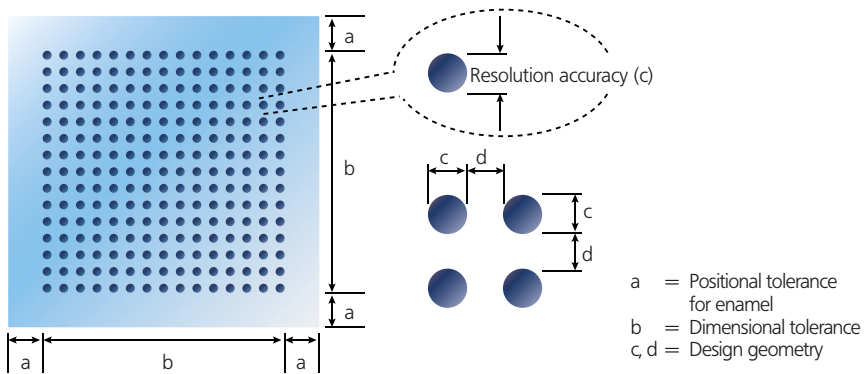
Positional and design tolerances for printed glazing units
